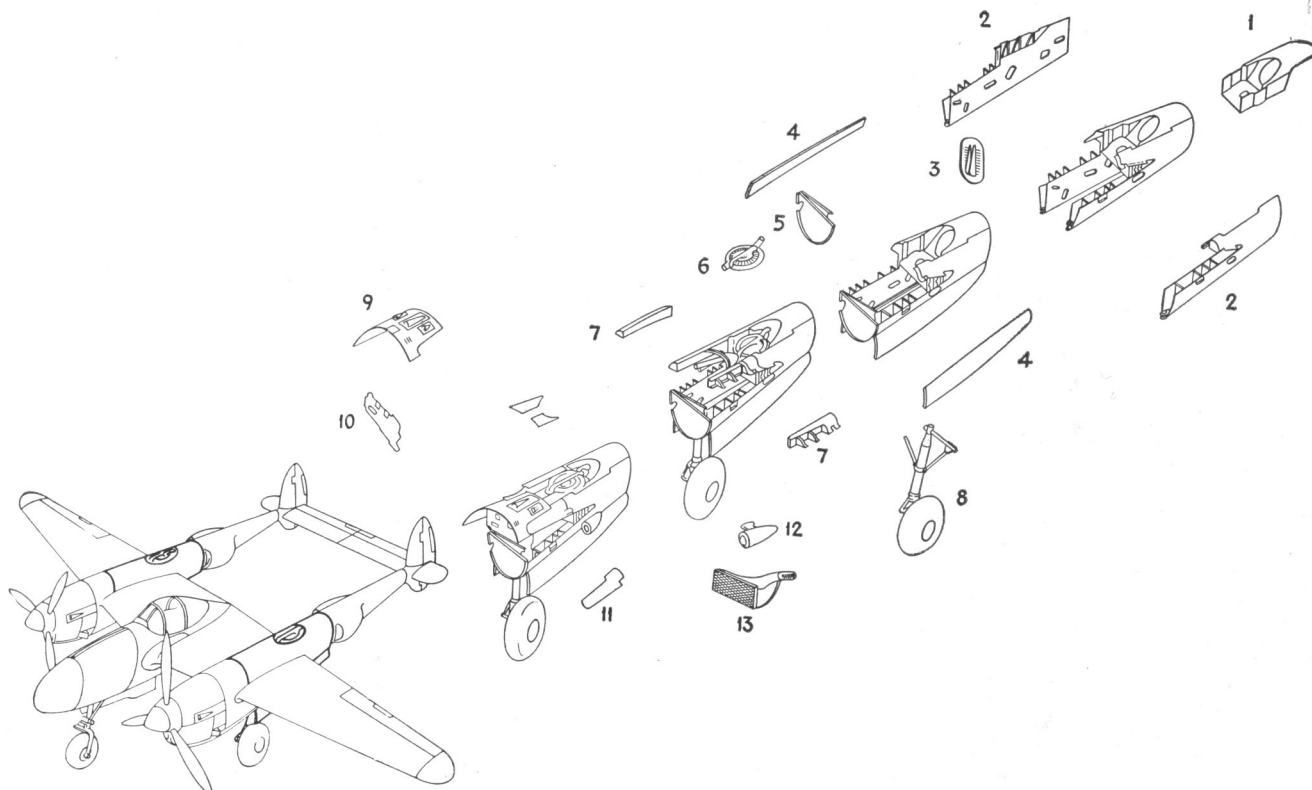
Exploded view of the components making up the forward boom. Beginning at upper right, units include: (1) deck assembly; (2) panels; (3) web; (4) main wheel well doors; (5) fire wall; (6) supercharger; (7) boom angles; (8) landing gear; (9) cover; (10) main beam fire wall; (11) fillet; (12) supercharger air-intake scoop; (13) air filter.
